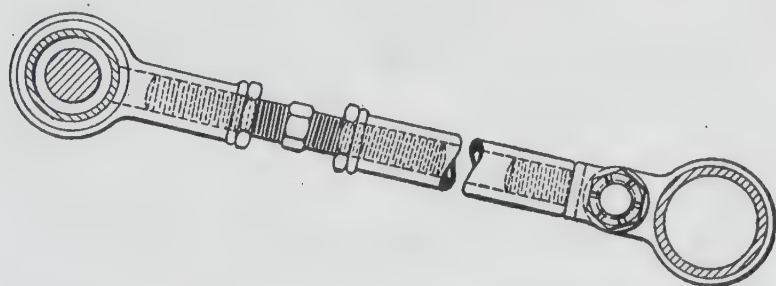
SIMPLE FORM OF RADIUS ROD.
